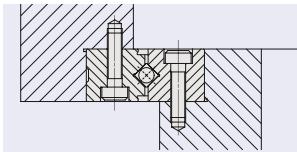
Example of mounting to the housing of Mounting Holed Type High Rigidity Crossed Roller Bearings (V)
